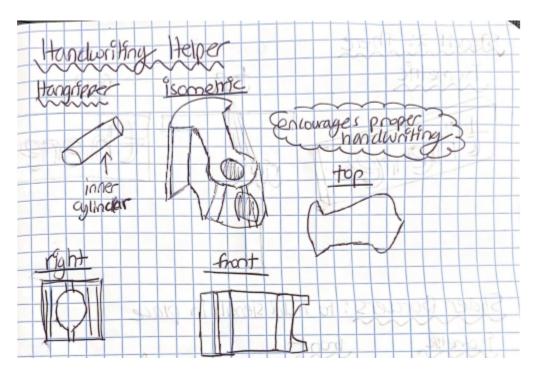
Drawings of Handgripper design including isometric, right, front, and top views
